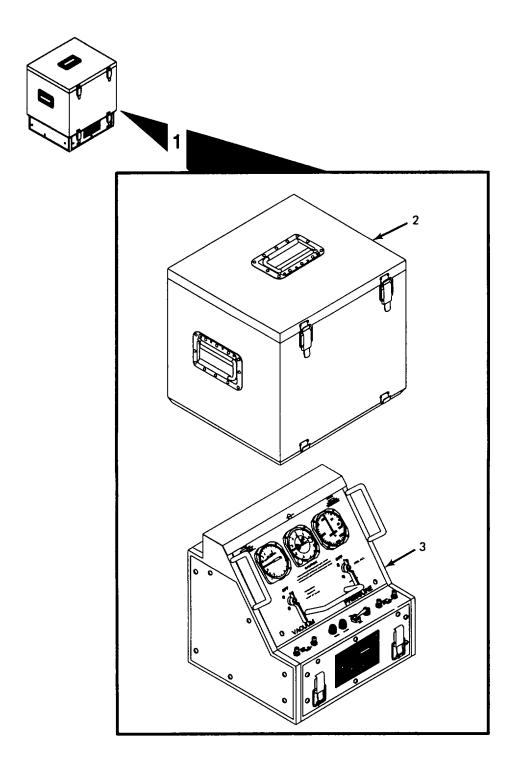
TESTER, PITOT, AND STATIC ASSEMBLY (3400-003)
